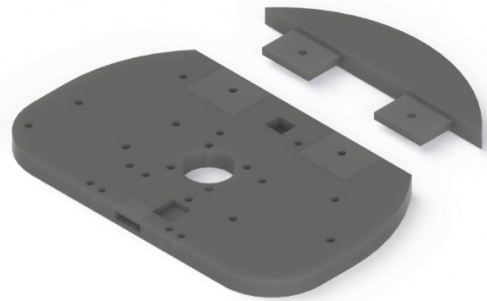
Modified neck rotation topper in two pieces so it could be manufactured in two piece
